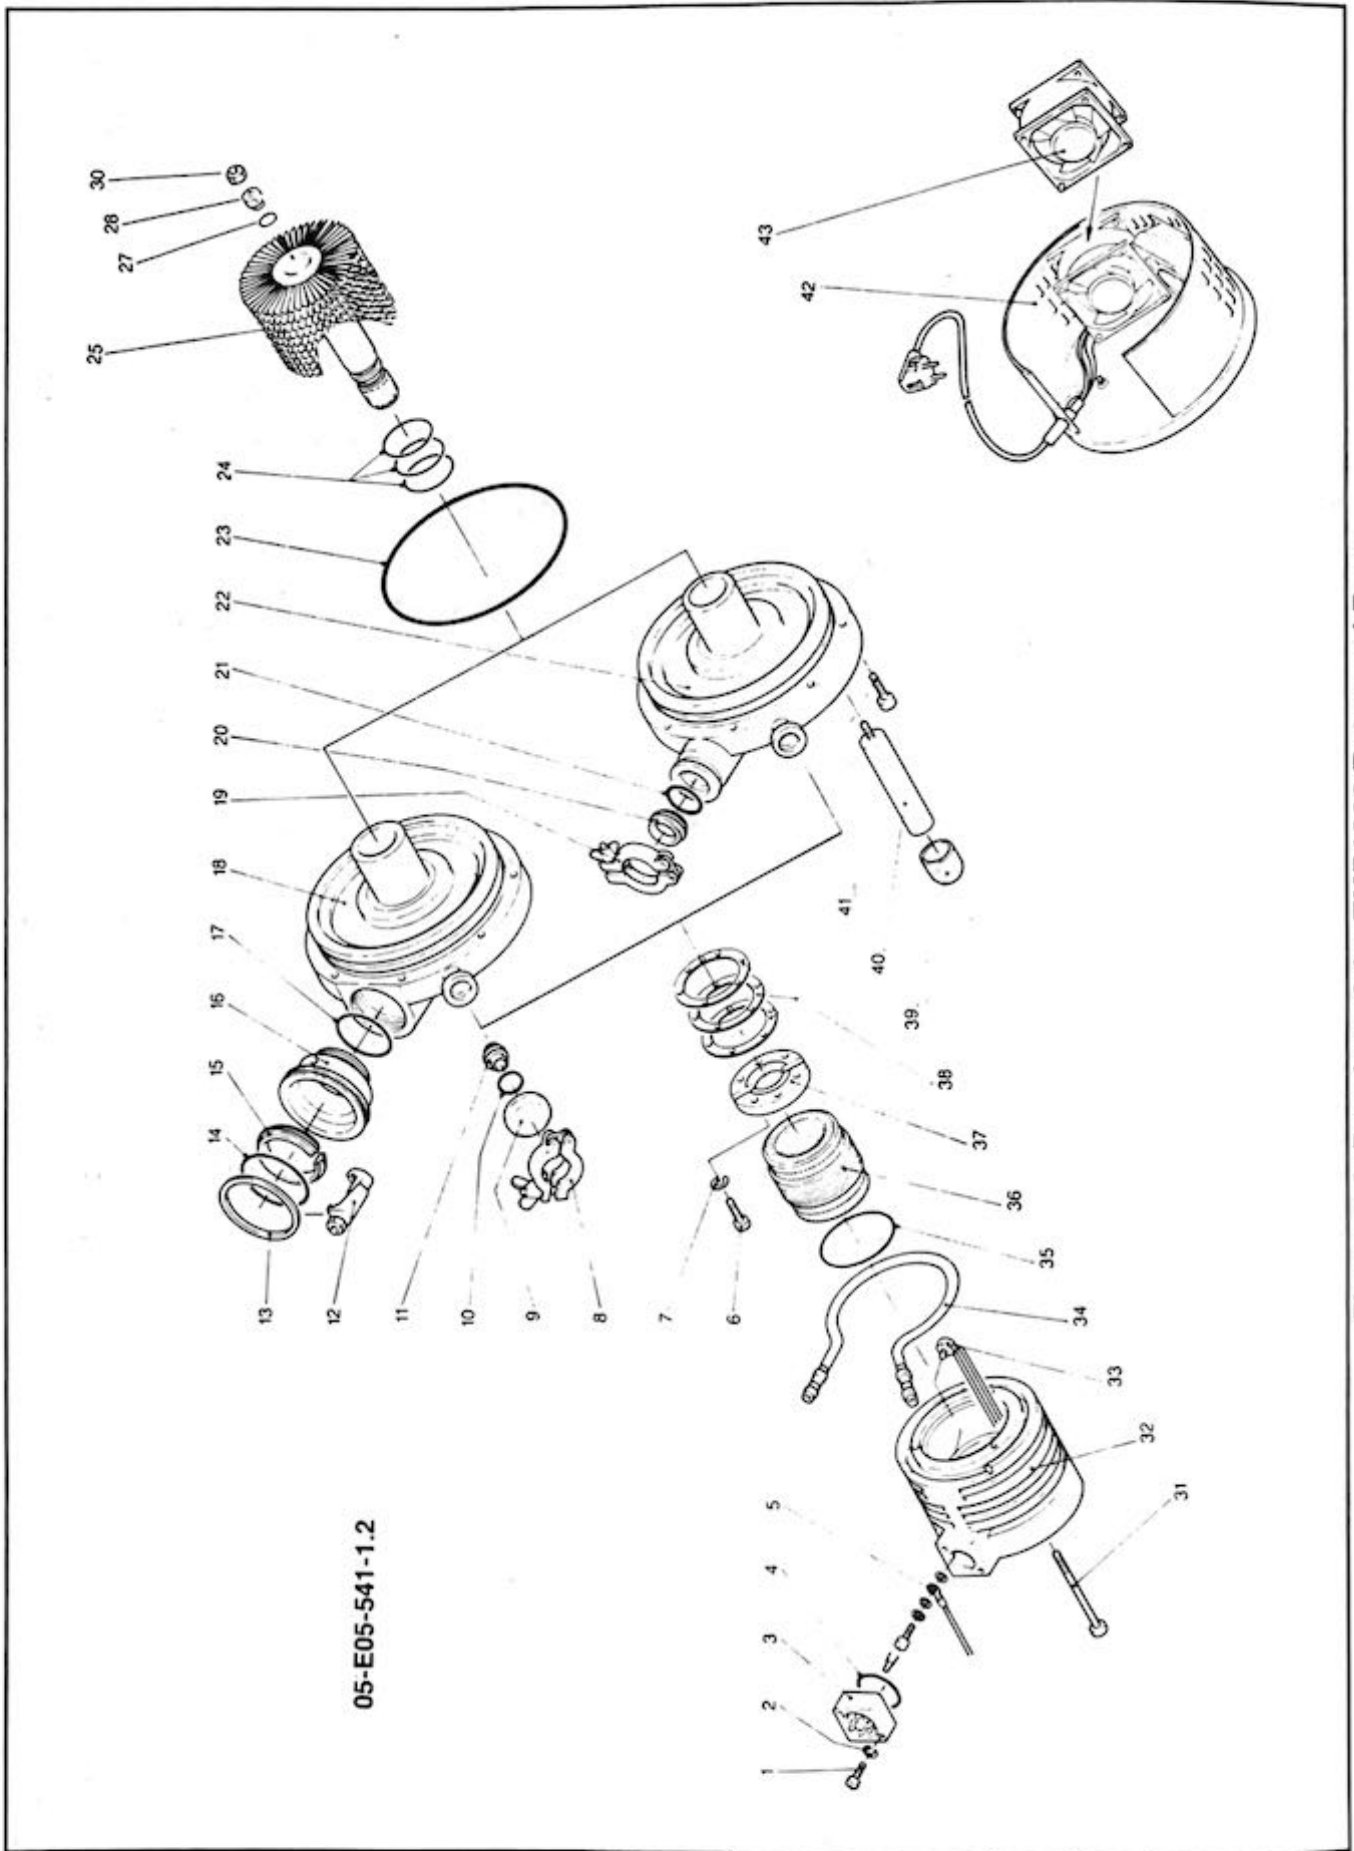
Drawing of the TMP1000 Rotor and Base
